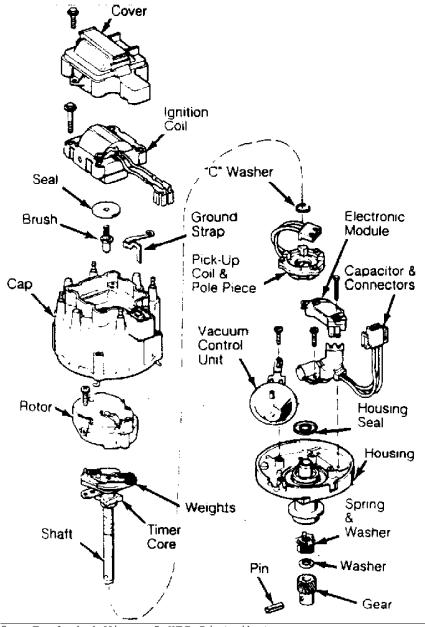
Exploded View of HEI Distributor Courtesy of General Motors Corp.
